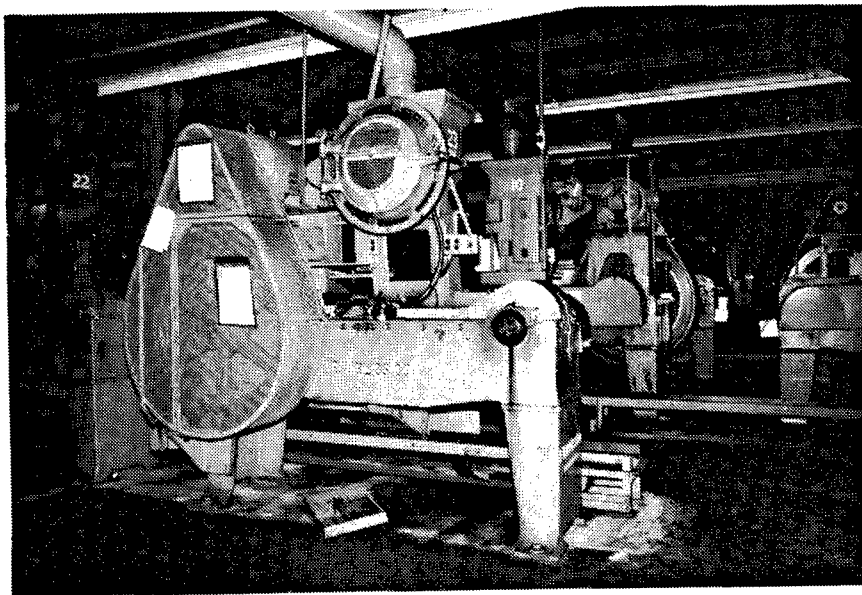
Building 102: Case Head Turn manufactured in 1941 by Jarecki Machine and Tool Company.
